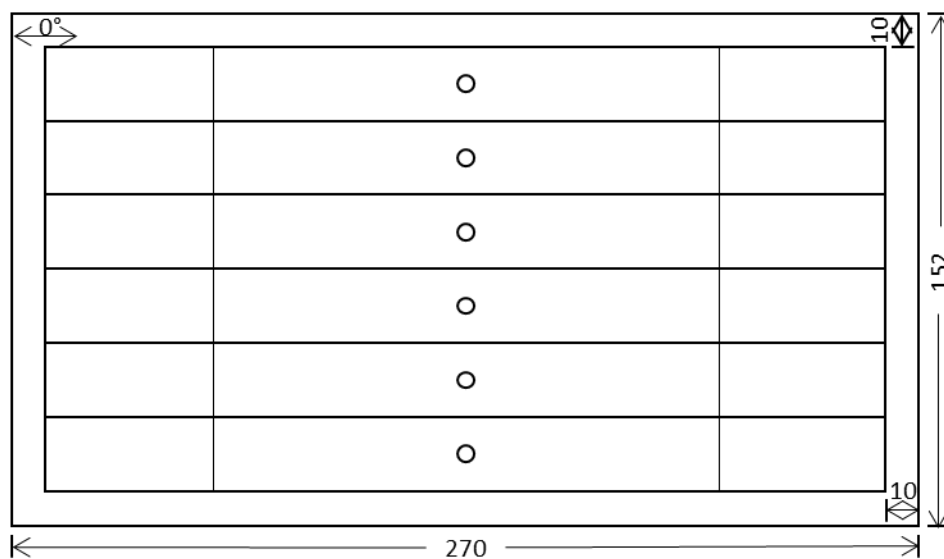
Positioning of the coupons on the test panels for open hole tensile test. All dimensions are expressed in mm.
